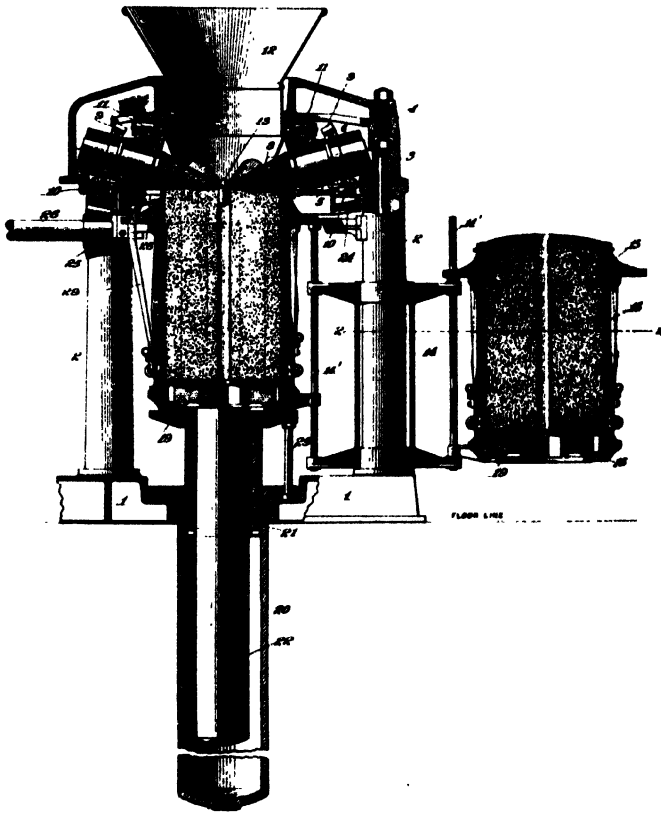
Ginnery Compress, End Packed Cylindrical Bale.
